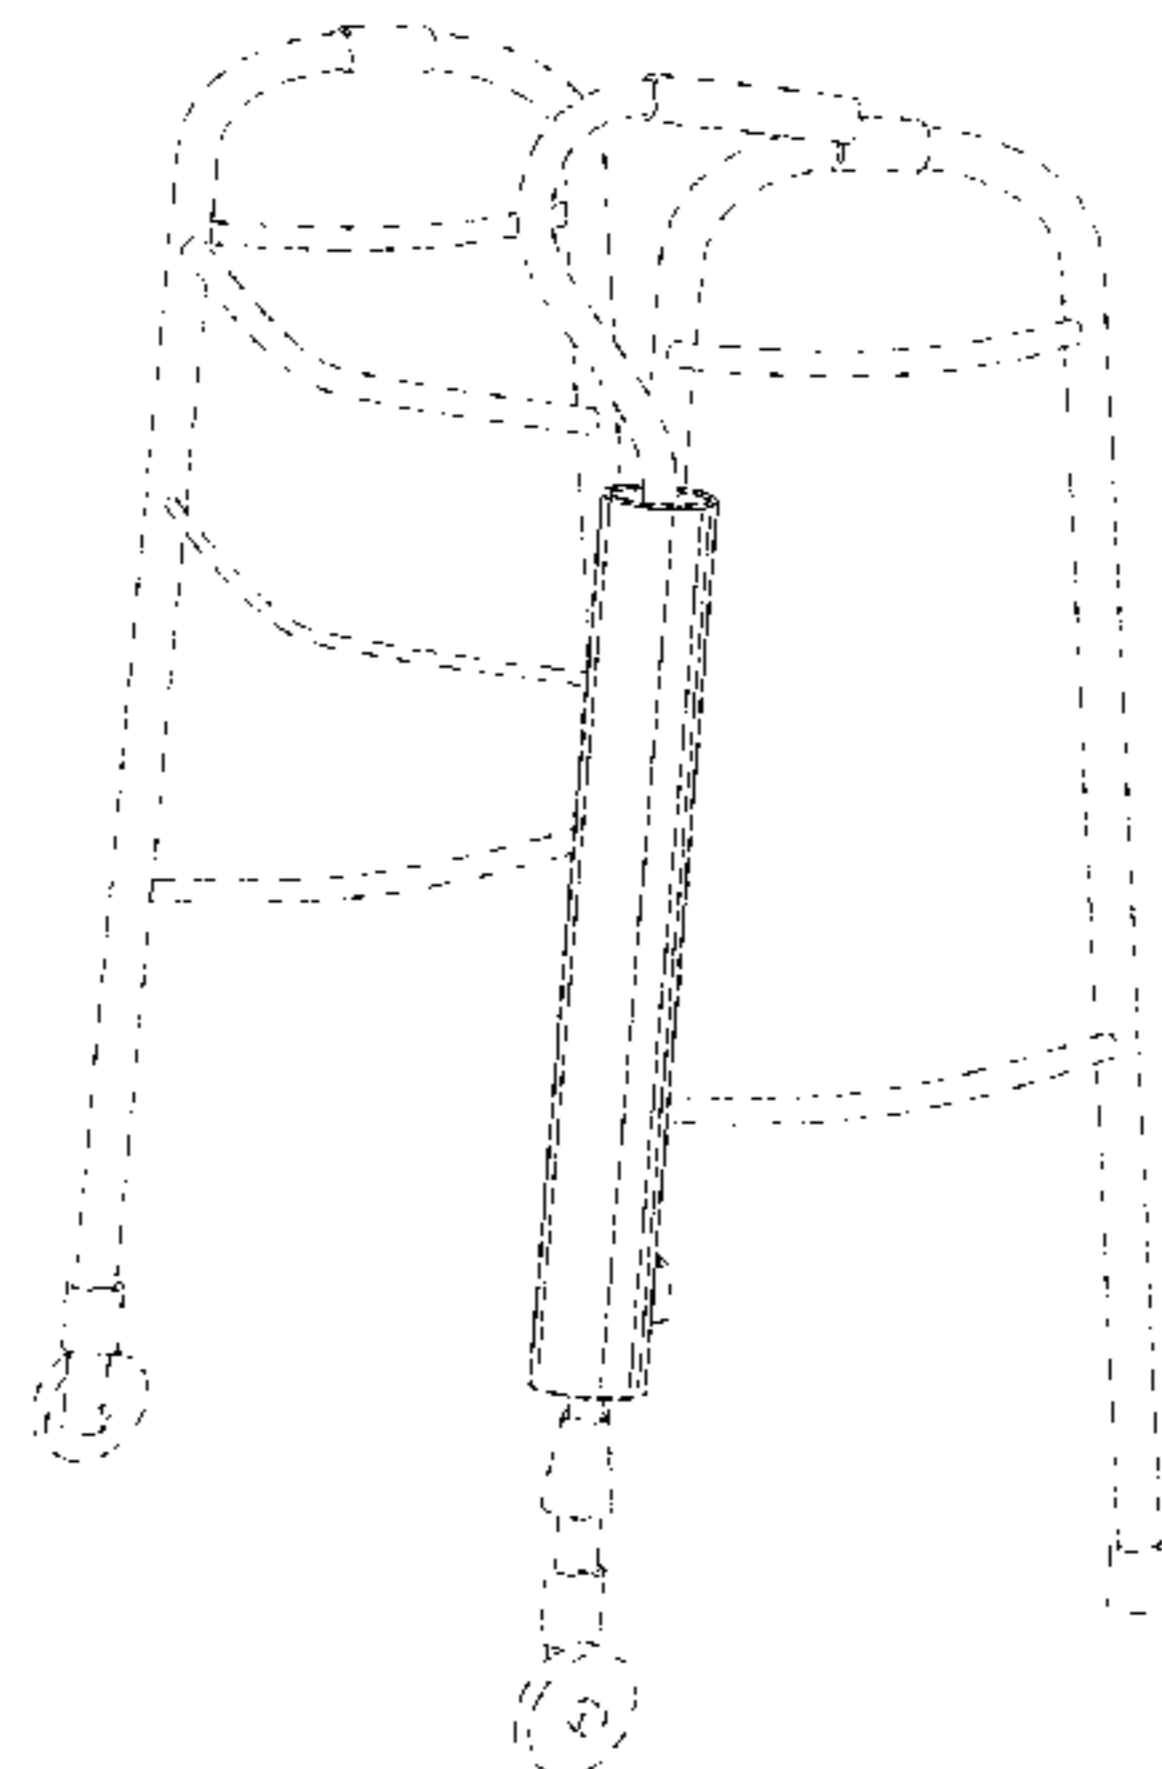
is a left side view of the tube-shaped holder for holding a cane of FIG. 1.
